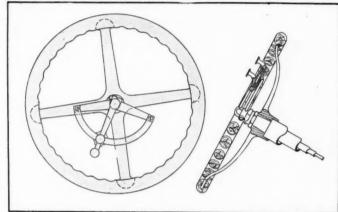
Steering wheel, showing mounting of spark and throttle quadrant and cross-section
